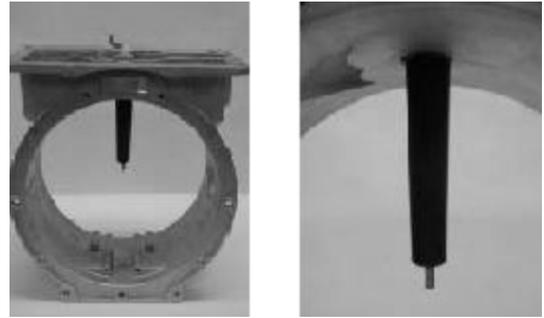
New center casting design / Nouveau modèle de pièce moulée centrale (before / avant 2007-06-05)
